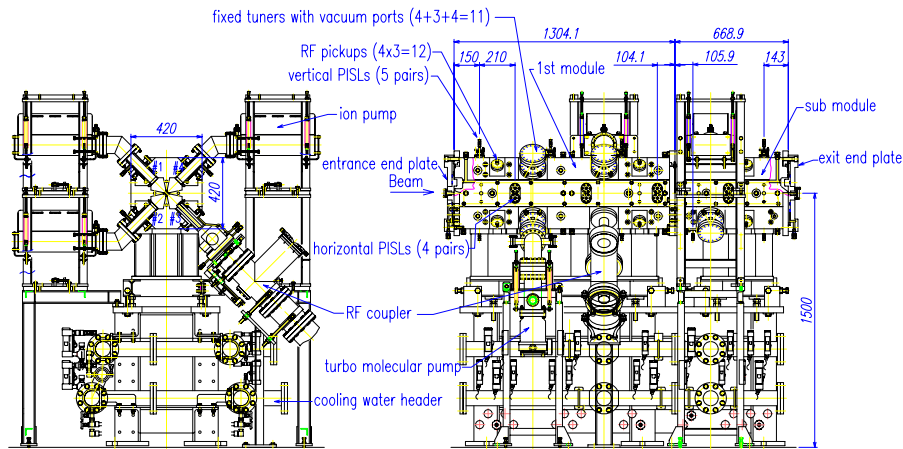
Schematic drawing of the 50mA RFQ prototype.
